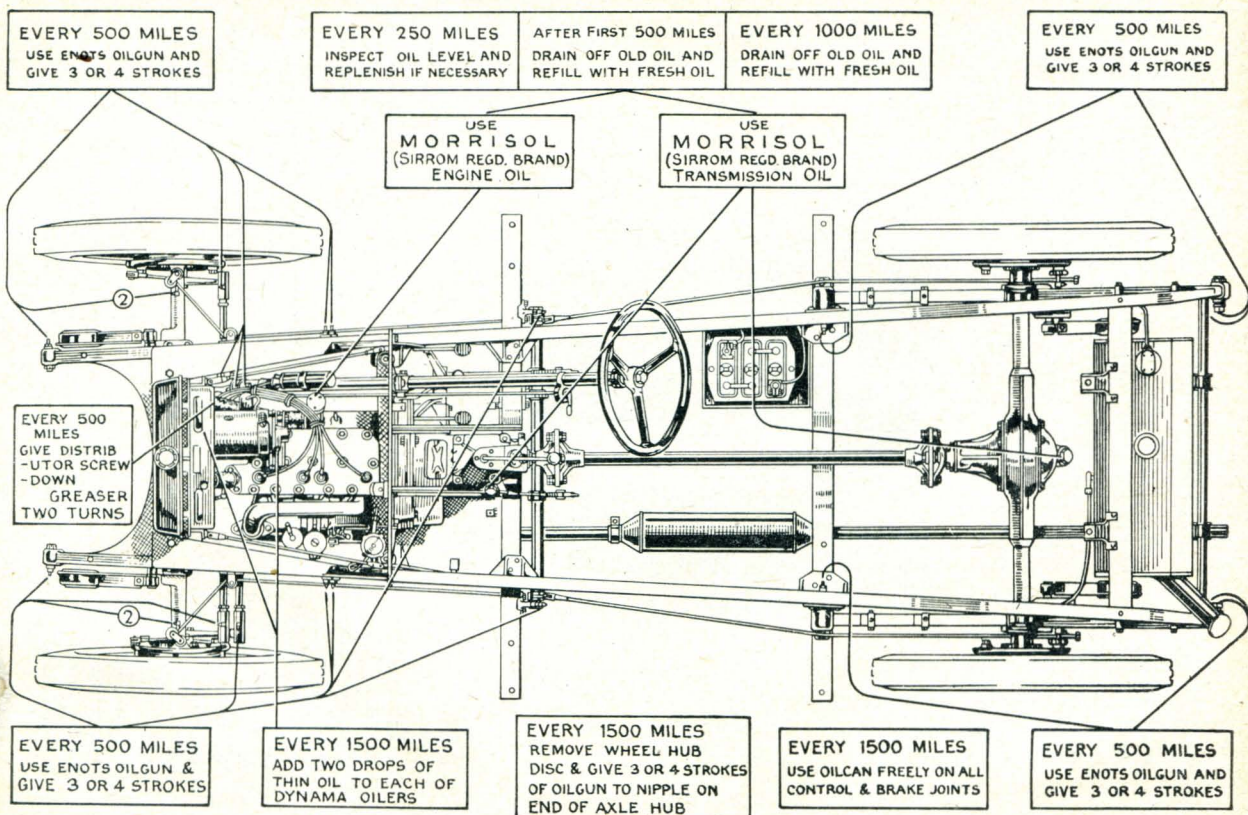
MINOR CHASSIS LUBRICATION CHART
